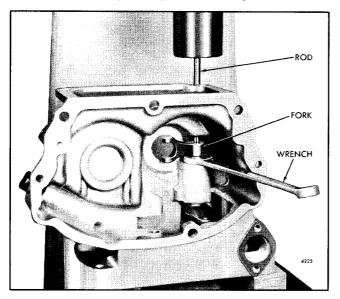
Removing Governor Operating Fork from Operating Shaft and Bearing Assembly
